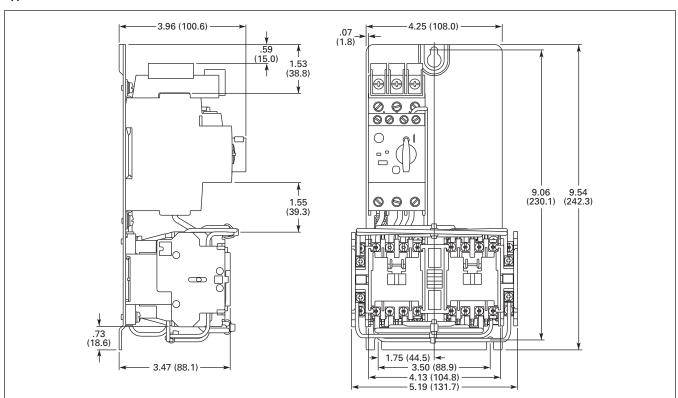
Reversing Combination Motor Controller AE357 (A307 MMP + CE55 45 mm Contactor) — Approximate Dimensions in Inches (mm)
